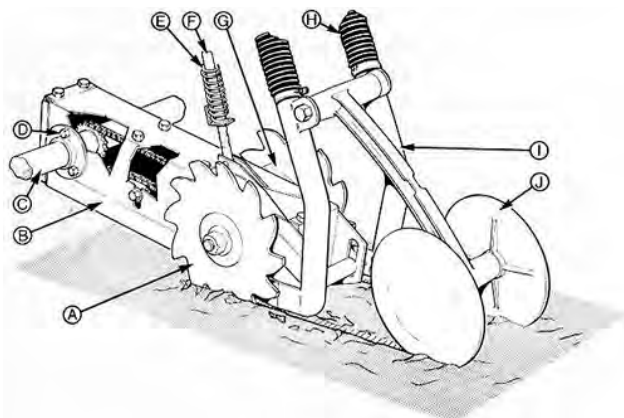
Cutter Wheel Unit: (A) Cutter Wheel, (B) Drive Unit Housing, (C) Drive Shaft, (D) Bearing Retainer, (E) Spring, (F) Push Rod, (G) Skid Plate, (H) Seed Tube, (I) Seed Boot, (J) Firming Wheel.
